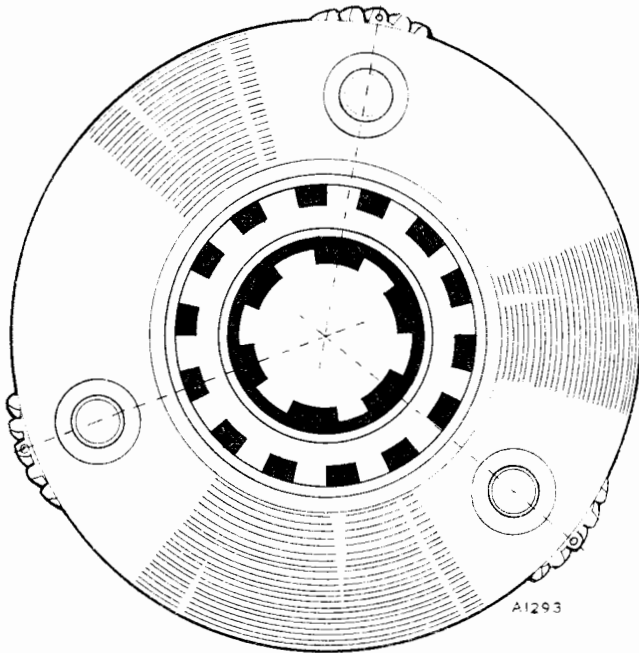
Before assembling the planet carrier to the sun wheel rotate the planet wheels until the punch marks are in the position shown.
